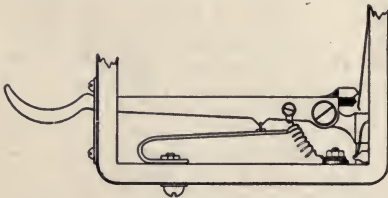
IMPROVED FORM OF AUTOMATIC SWITCH.
